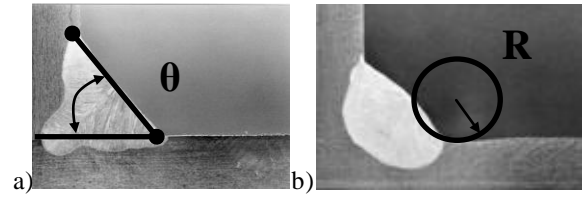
a) Weld toe tangent angl; b) Weld toe radii
